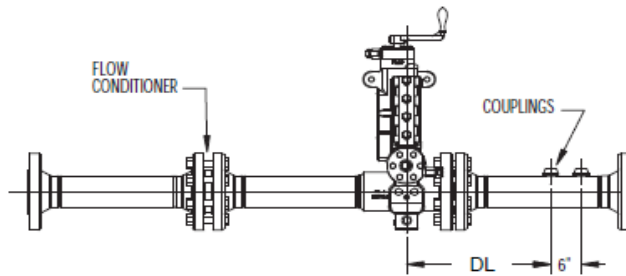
Downstream Straight Pipe Lengths for Instrumentation Coupling Installation
